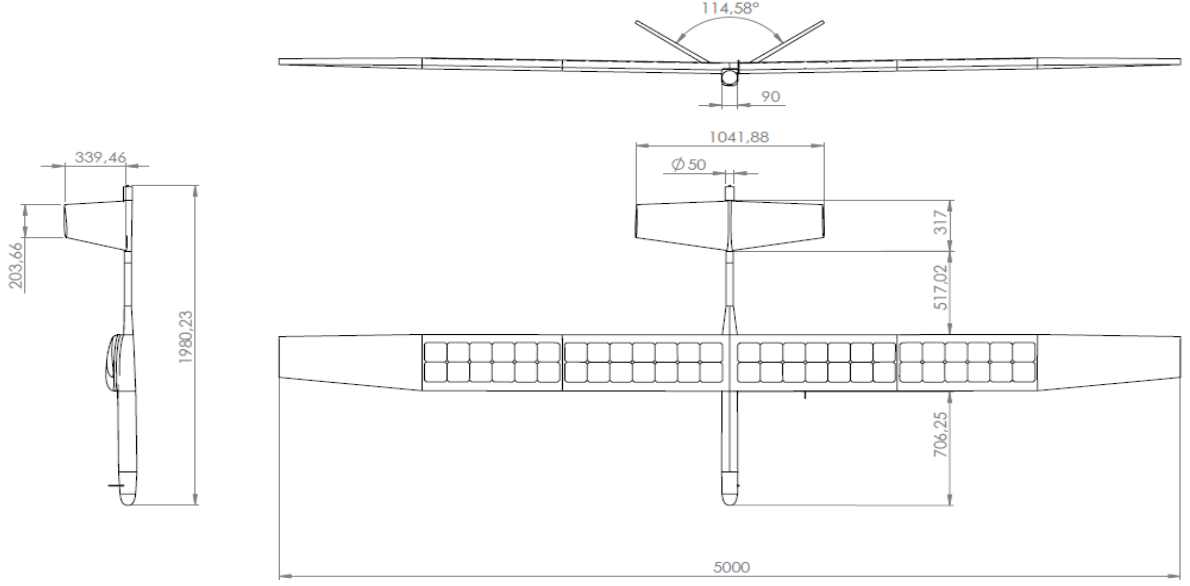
Three view drawing of the LEEUAV, dimensions in mm.
